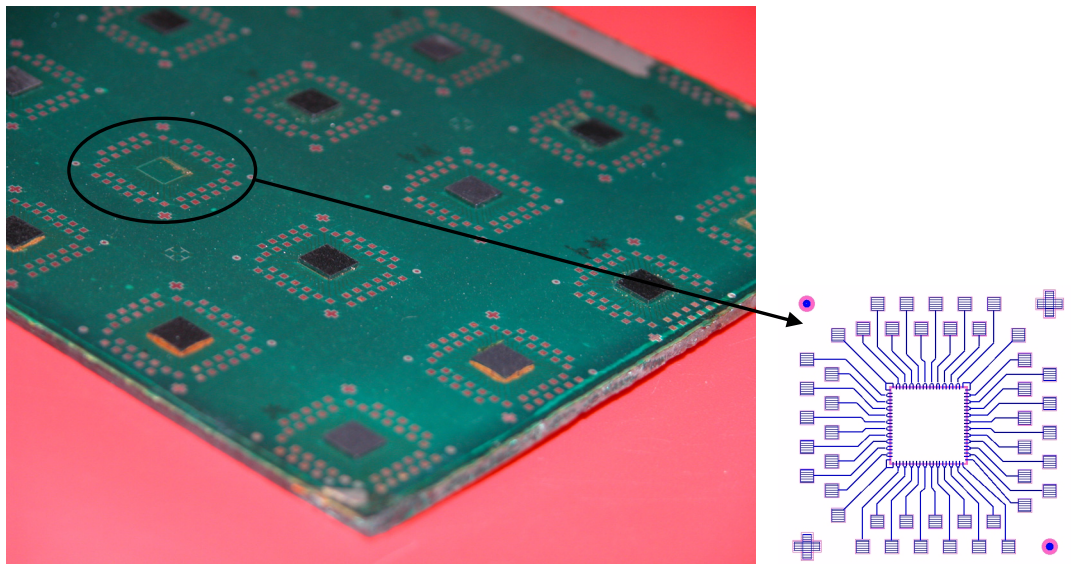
Picture of a flip-chip (200µm pitch; 5mm x 5mm) assembled C-SiC board and coupon daisy-chain layout.
